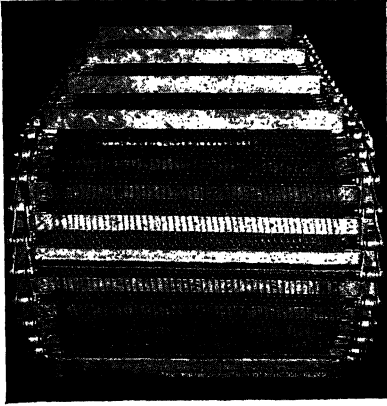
Quench tank with conveyor made of woven wire mounted on chains at both sides, which will handle pieces up to about 10 lbs in weight.
